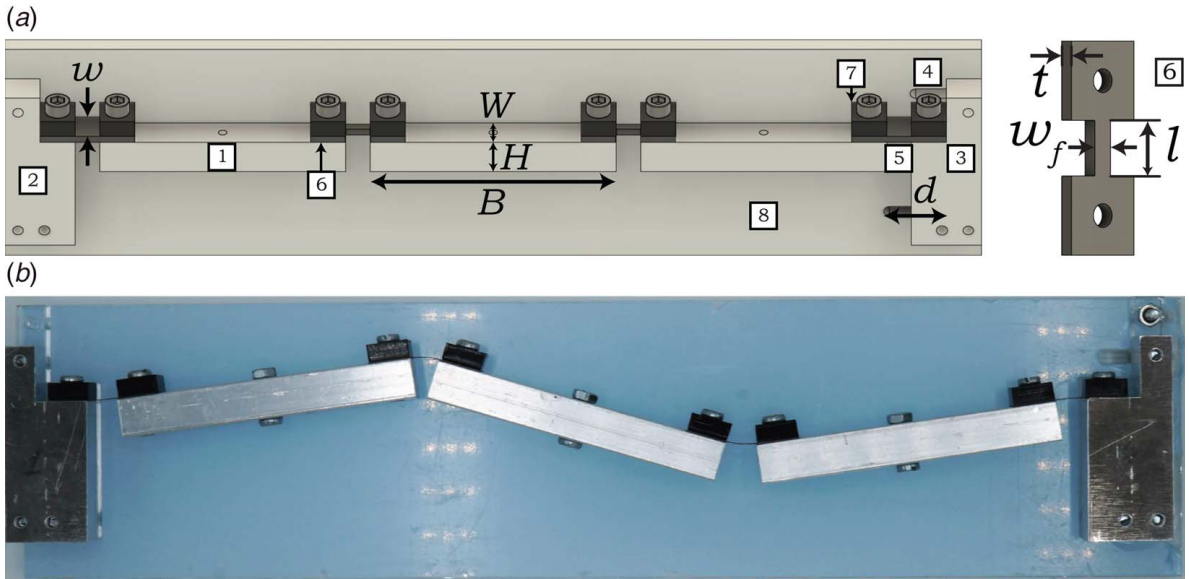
Designed lumped-compliant four-bar mechanism: (a) schematic showing the design of the unloaded mechanism and ungrounded flexures with the dimensions indicated. The design comprises (1) rigid links, (2) grounded revolute joint, (3) slider joint, (4) with pre-loading slots, (5) grounded flexures, (6) ungrounded flexures with variable width, (7) PMMA caps, and (8) mounting base plate. (b) By applying a pre-load the manufactured mechanism may buckle into the S-mode.
